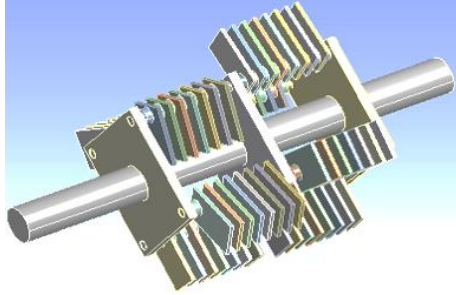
Isometric view of rotor's assembly for the pulverizer
